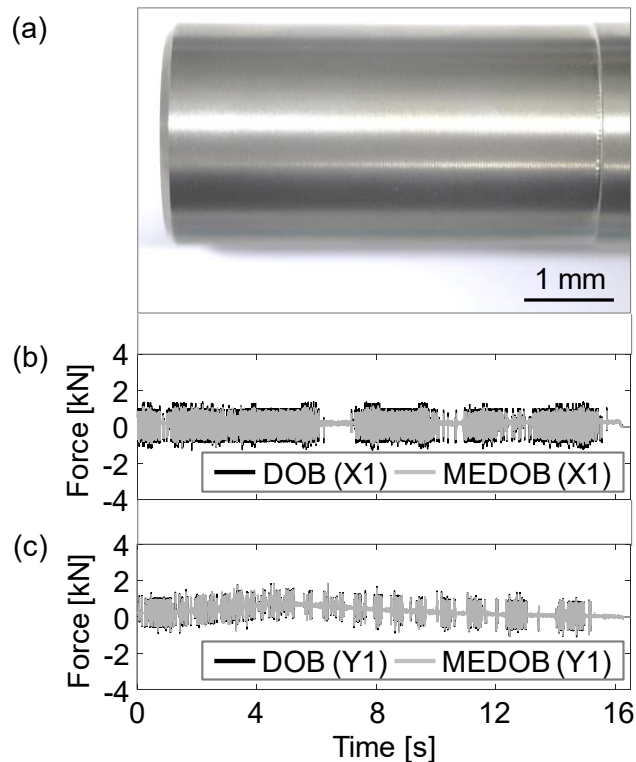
Machined surface and estimated cutting forces with 0.3 mm width of cut
